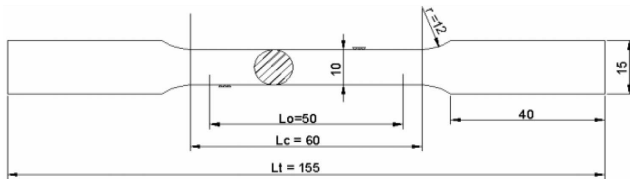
ASTM A597 standard tensile sample 2D technical drawings.
